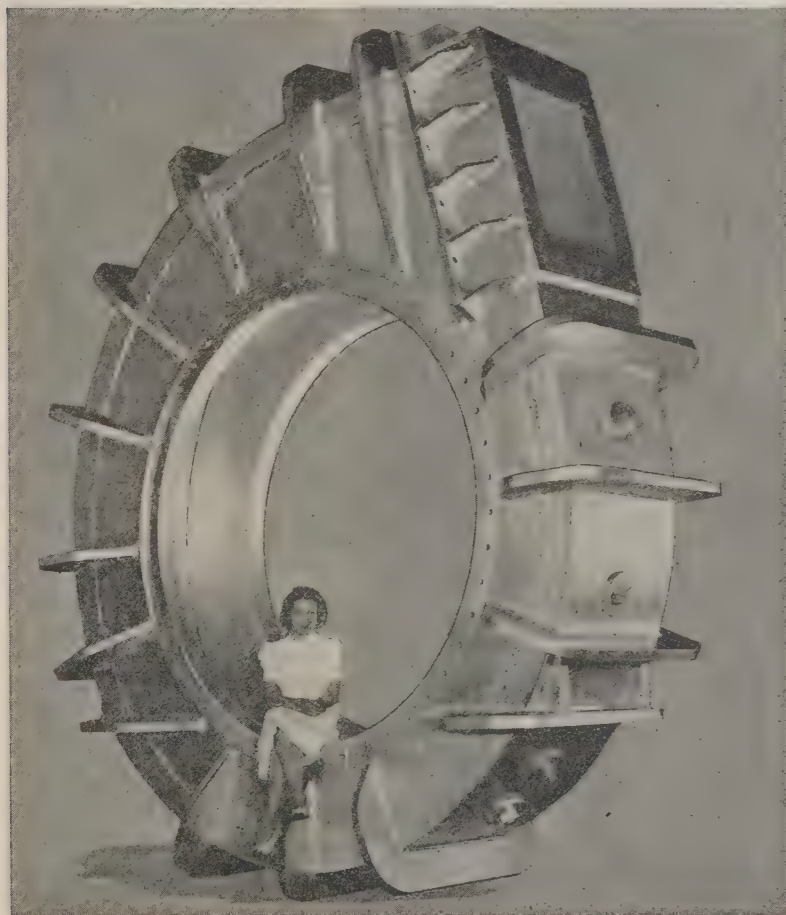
PUMP CASING UTILIZING COMPONENTS SHOWN IN FIG. 17
